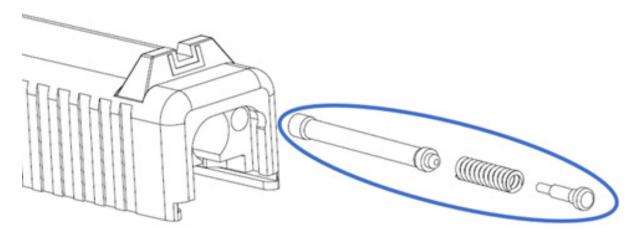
Extractor Depressor Plunger, Extractor Depressor Plunger Spring, and Spring Loaded Bearing.
